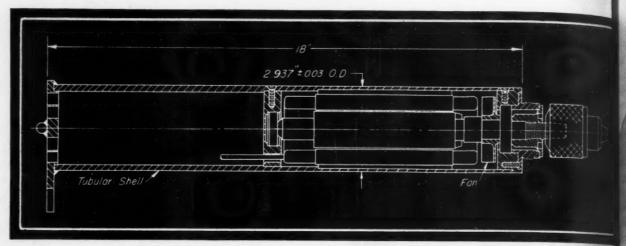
A special high-speed built-in power drill spindle which develops 2 hp at 15,000 rpm
